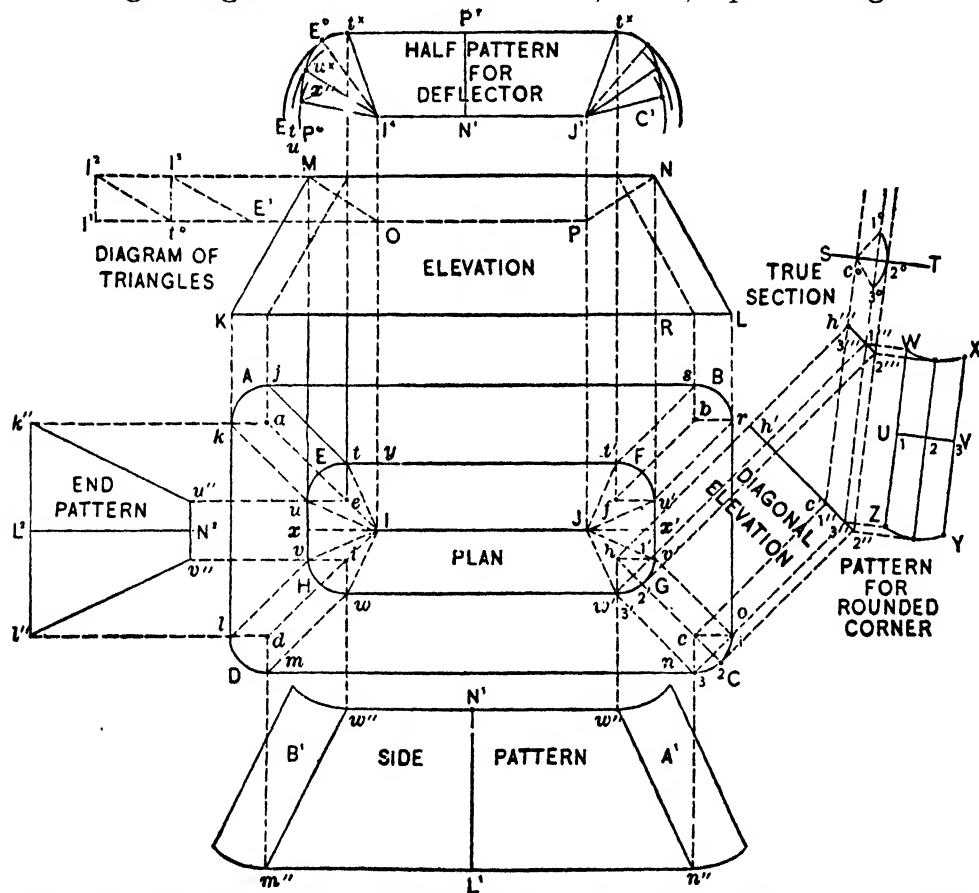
Plan, Elevation, Diagonal Elevation, True Section, Diagram of Triangles and Patterns
